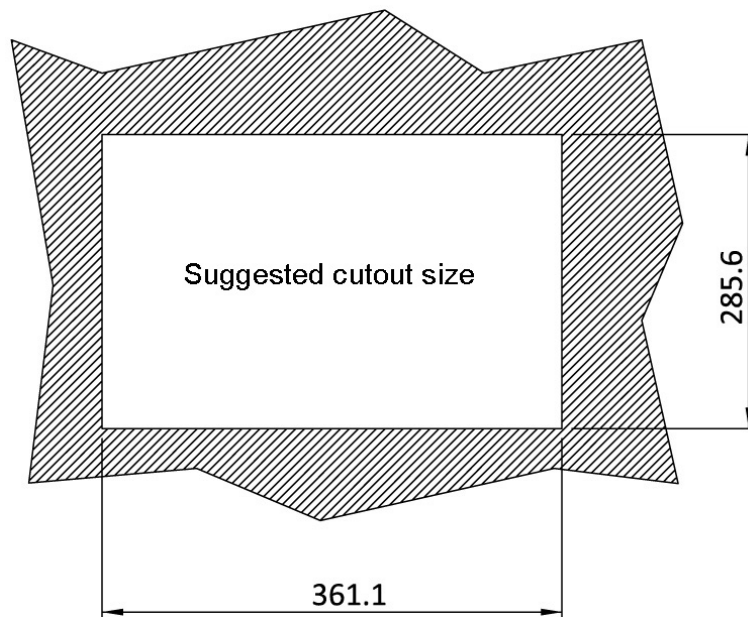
PPC-F15A-H81 Panel Cutout Dimensions
